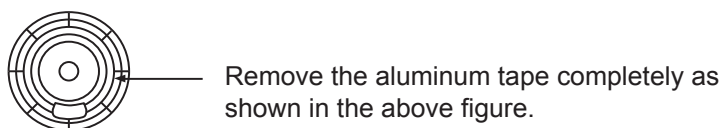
Coaxial Cable Aluminum Tape Removal 2
